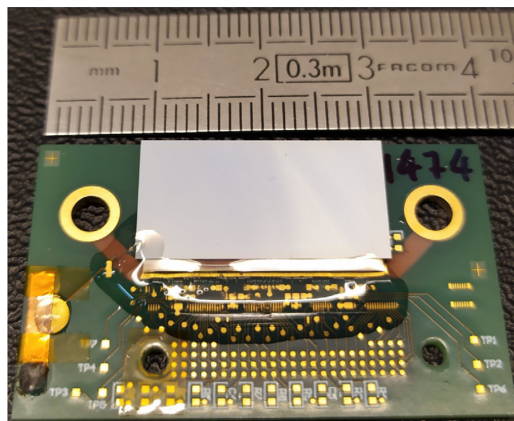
Pixel sensor and RD53A ROC assembly glued and wire bonded onto a Type-B SCC. Wire bonds are encapsulated with silicone elastomer to be protected. The light-gray front surface is the metallised sensor back-side, where high voltage bias wire bondings are connected in the lower left corner.
